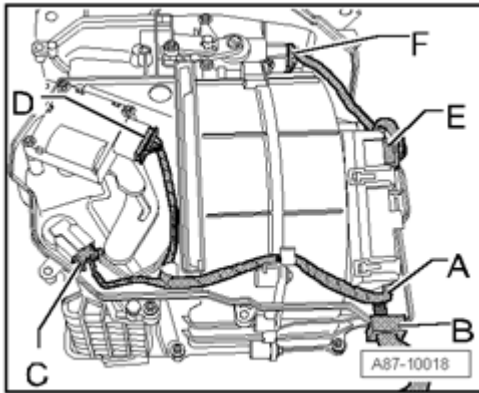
Identifying Connectors, Routing Of Wiring, And Socket
